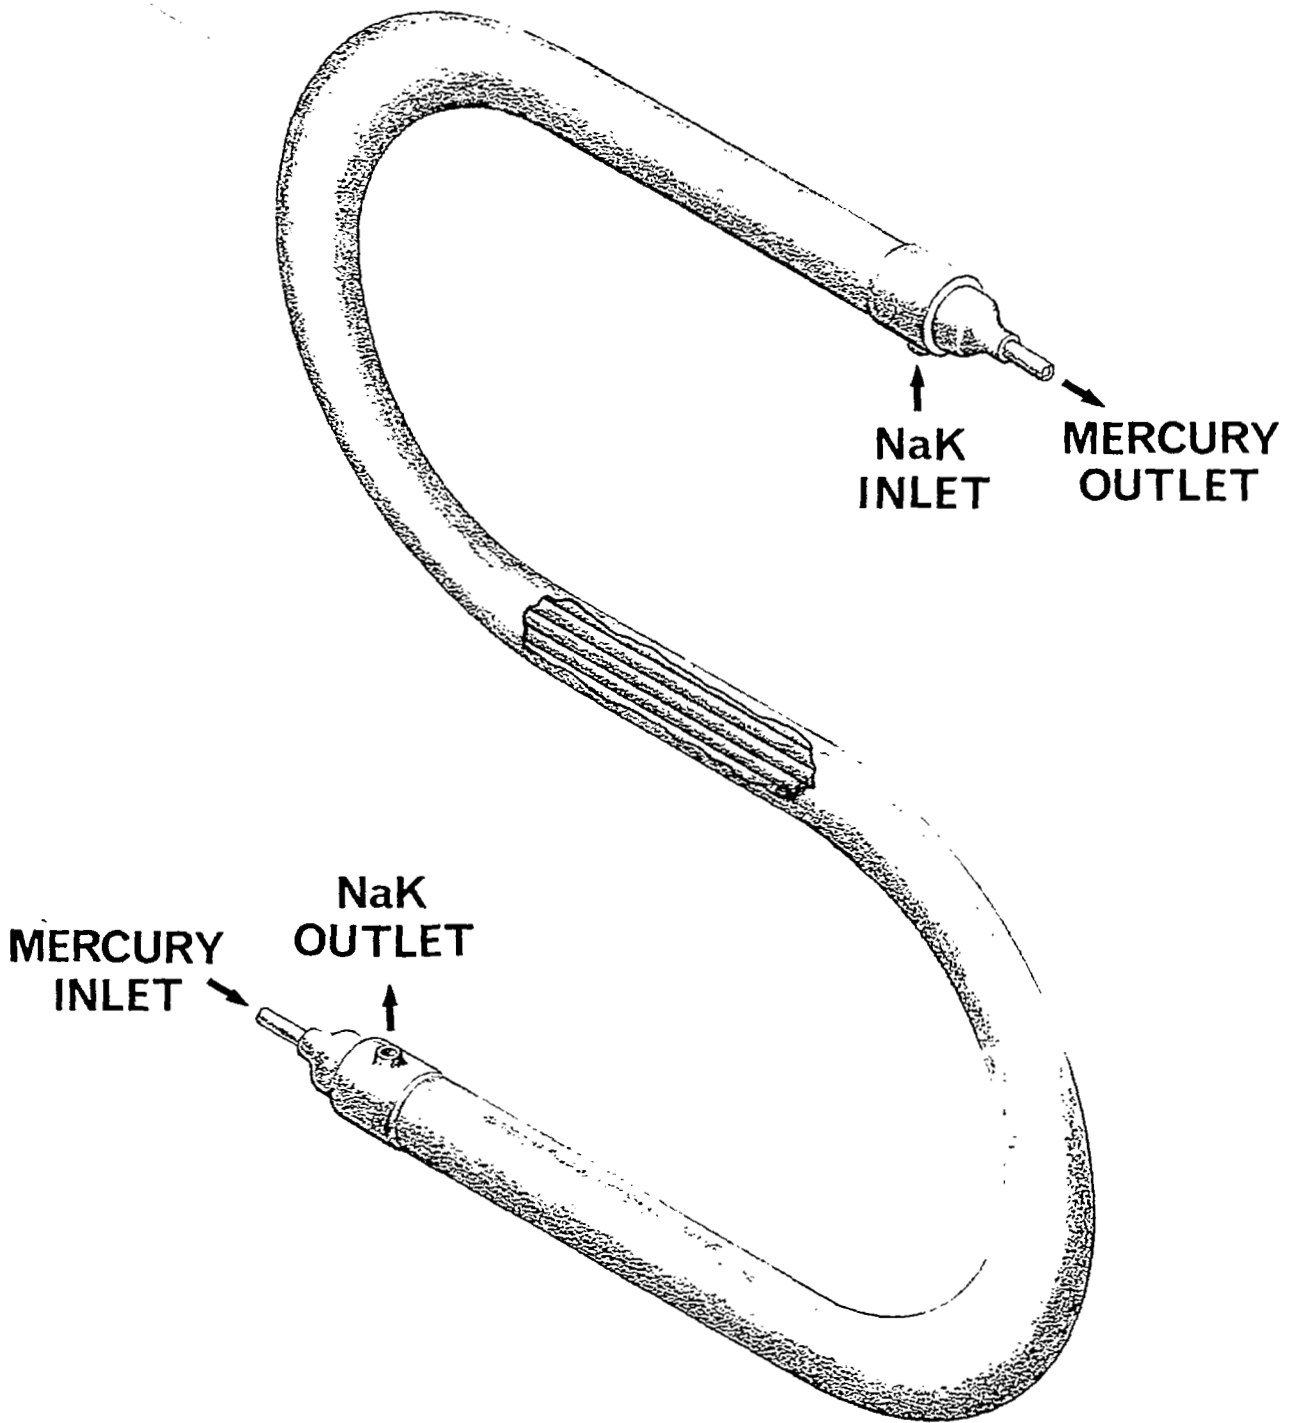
BRDC Boiler No. 5, Cutaway View
